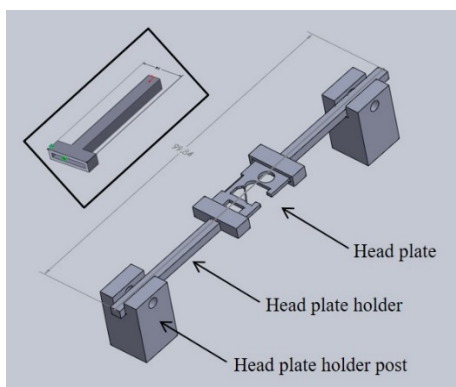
Two head plate holders grip each side of a head plate. The head plate is permanently attached to the skull of a mouse. Head plate holder posts position the holders and head plate above the base plate with sufficient space for positioning the head of an adult mouse (see Figure 3-1B). The entire assembly is 22 mm tall, 14 mm wide, and just under 100 mm long. Inset. Detailed view of a head plate holder. The long arm has a square cross section (3.7 mm x 3.7 mm) that fits into a square hole in a holder post. One end of the head plate fits into the slot in the t-shaped end. The slot is 12 mm long, 1 mm wide and 1 mm deep. The overall width is 14 mm and the overall length is 41 mm. These dimensions can be adjusted for different sized head plates [15].
